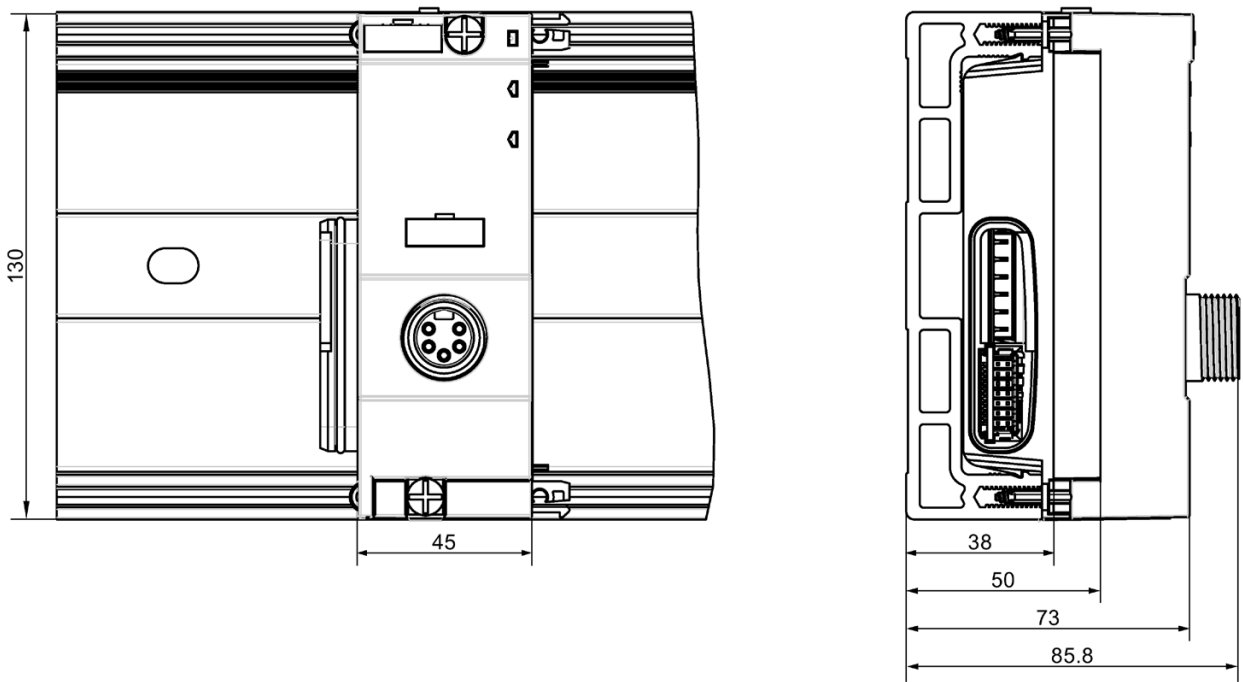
Dimensional drawing of the power module with CM PM 7/8" connection module
